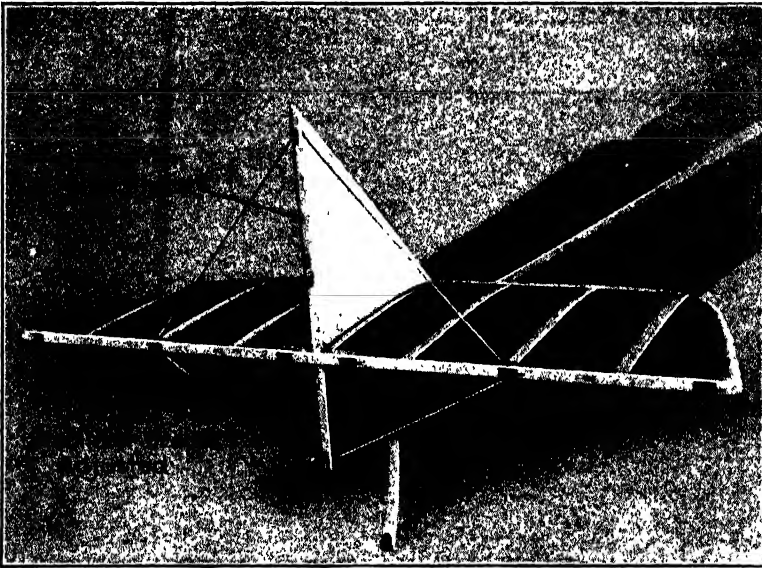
Rear View of Fuselage Showing Vertical Fin Assembled and Stabilizer Braces in Place.
